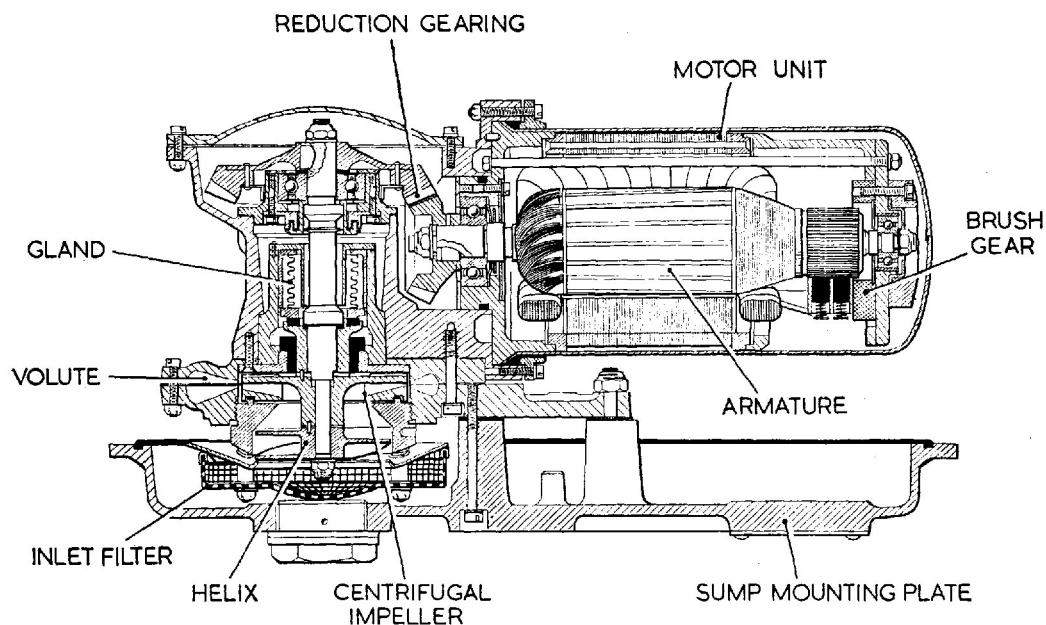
Sectional view of SPE.1203B Mk. 2A fuel pump
